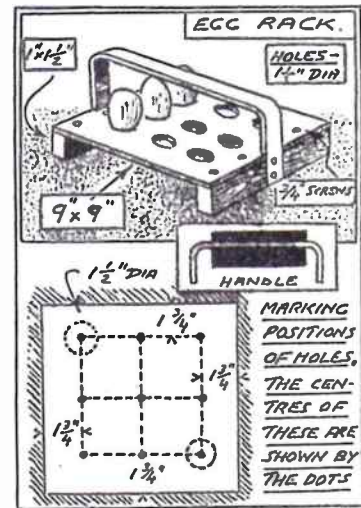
Details of the egg rack, which is designed to hold nine eggs
